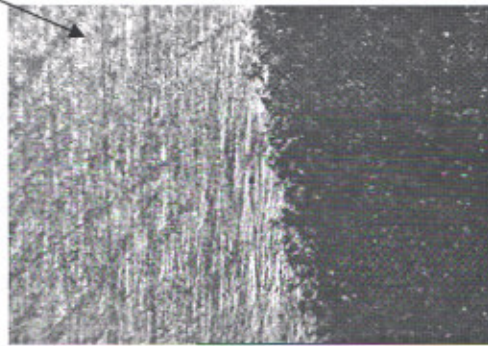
Photomicrograph of the machined surface showing comparison of the conventional machining and ultrasonic machining (Magnification; 100x)
